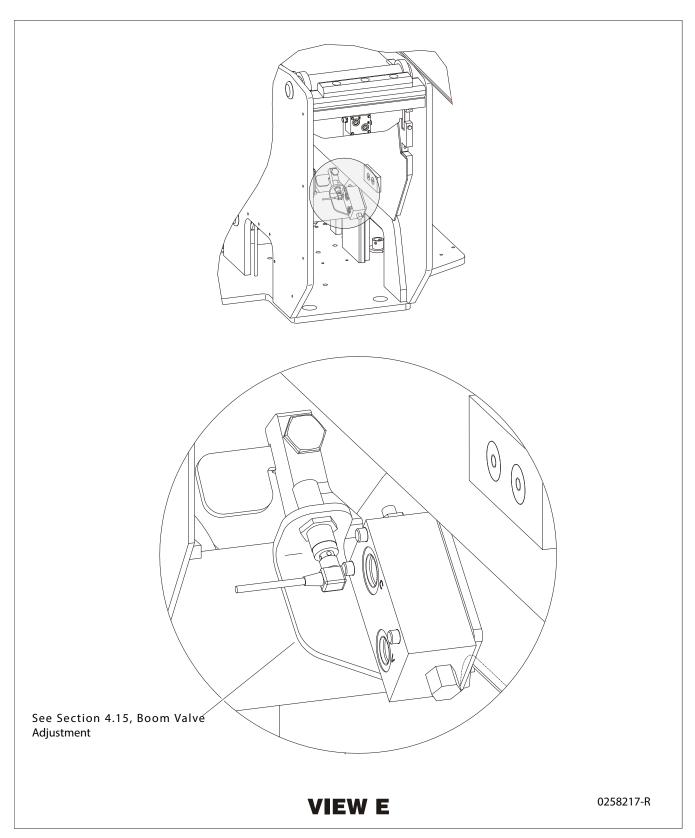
Boom Valve and Limit Switches Location. (Sheet 3 of 3)
